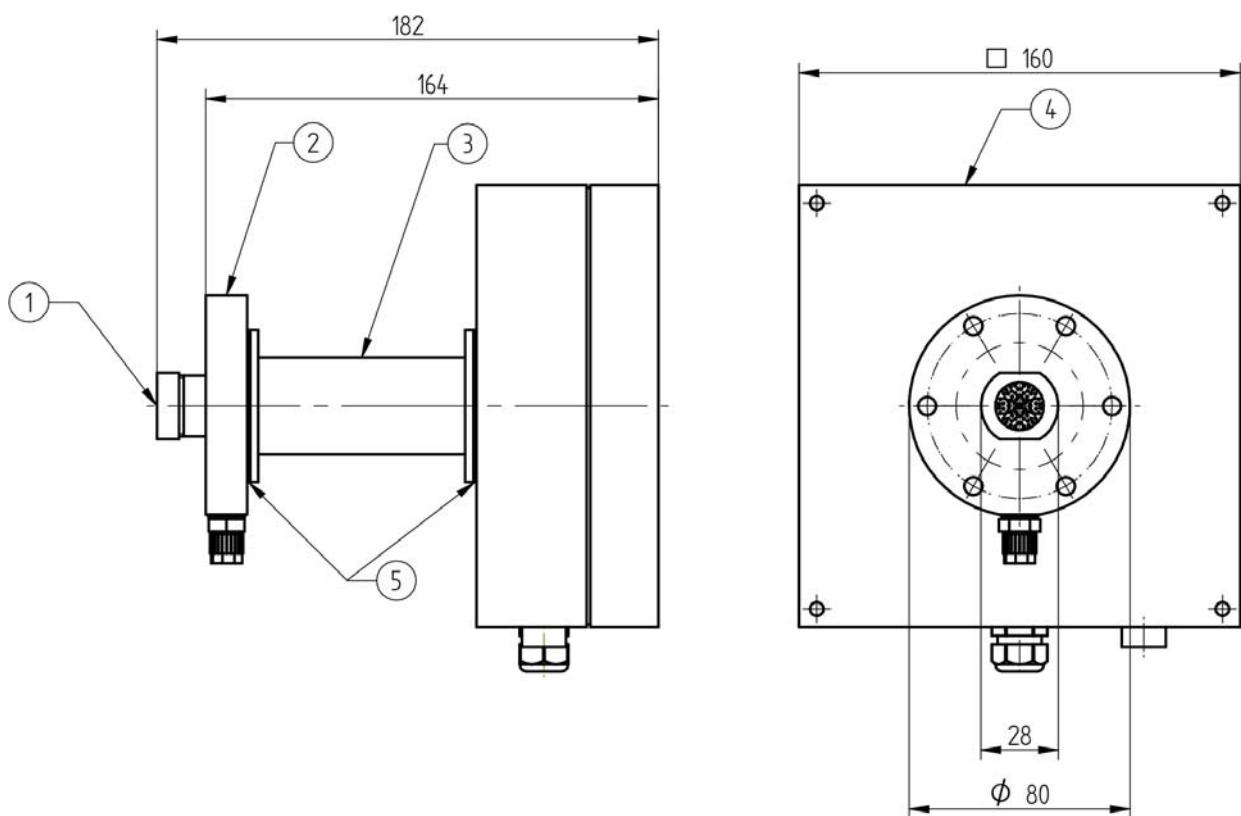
Dimensional drawing Combination Probe KS2D_{NOx}
